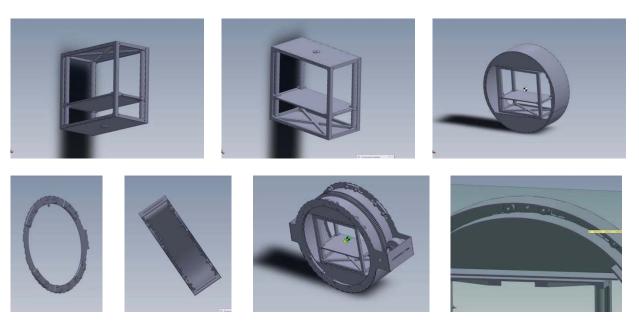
Pan axis camera mount height adjustment options; bearing running surfaces.
